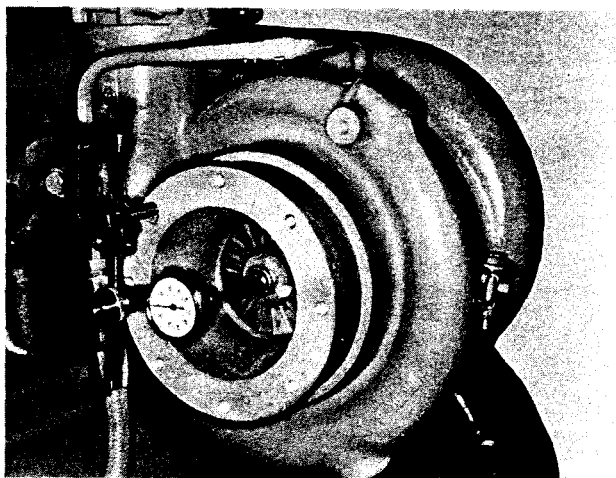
, (N11956). Checking turbocharger bearing and clearance
